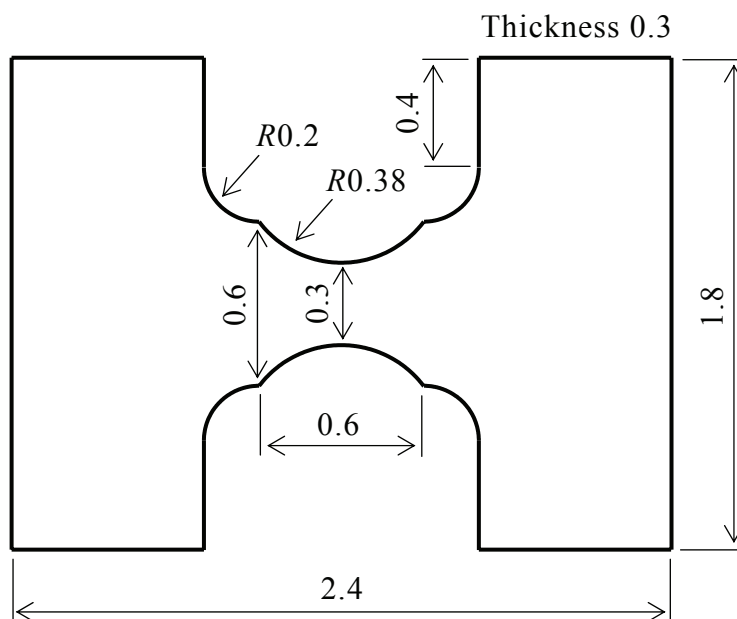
Shape and dimension of tensile-shear specimen with a spot weld (unit : mm).
